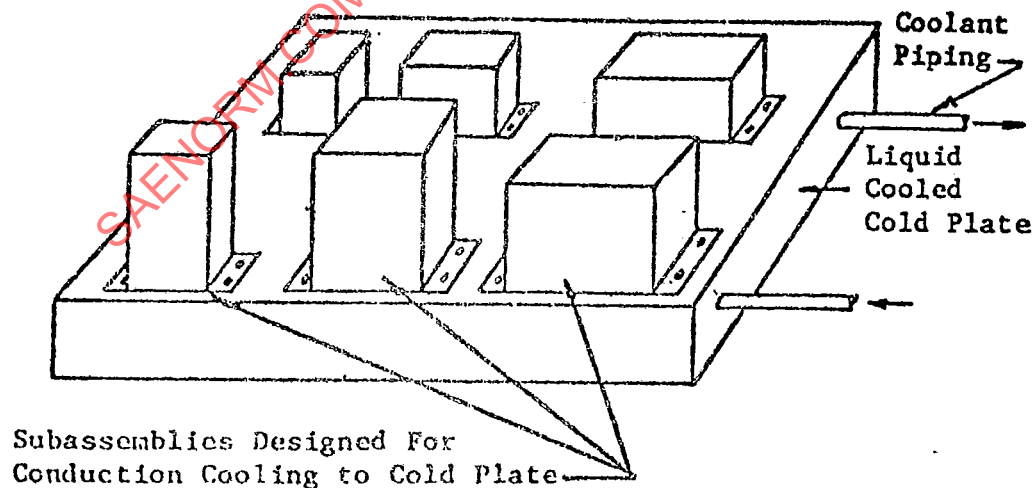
Indirect Liquid Cooling with Integral Cold Plate
